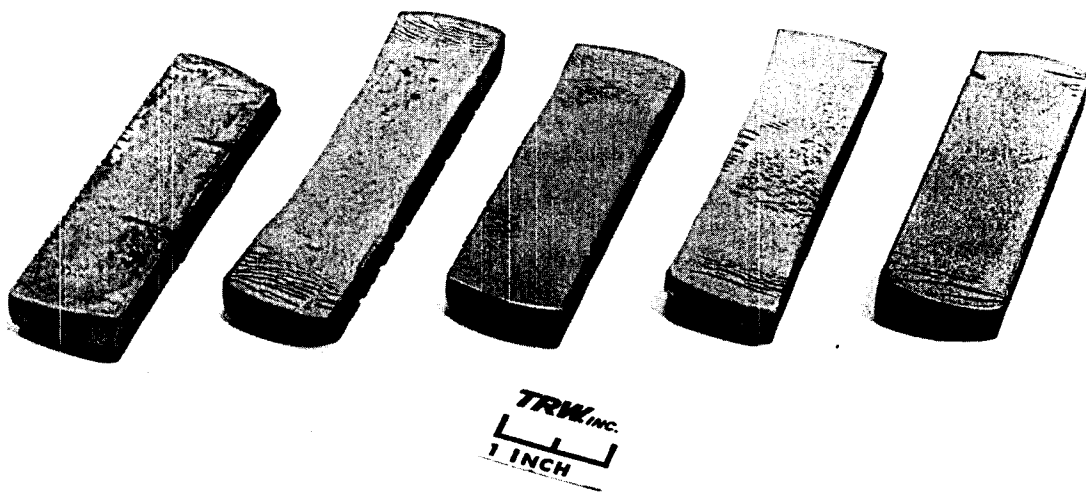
(a). Second Series of Forging Trials - MA-6000 Forgings.
